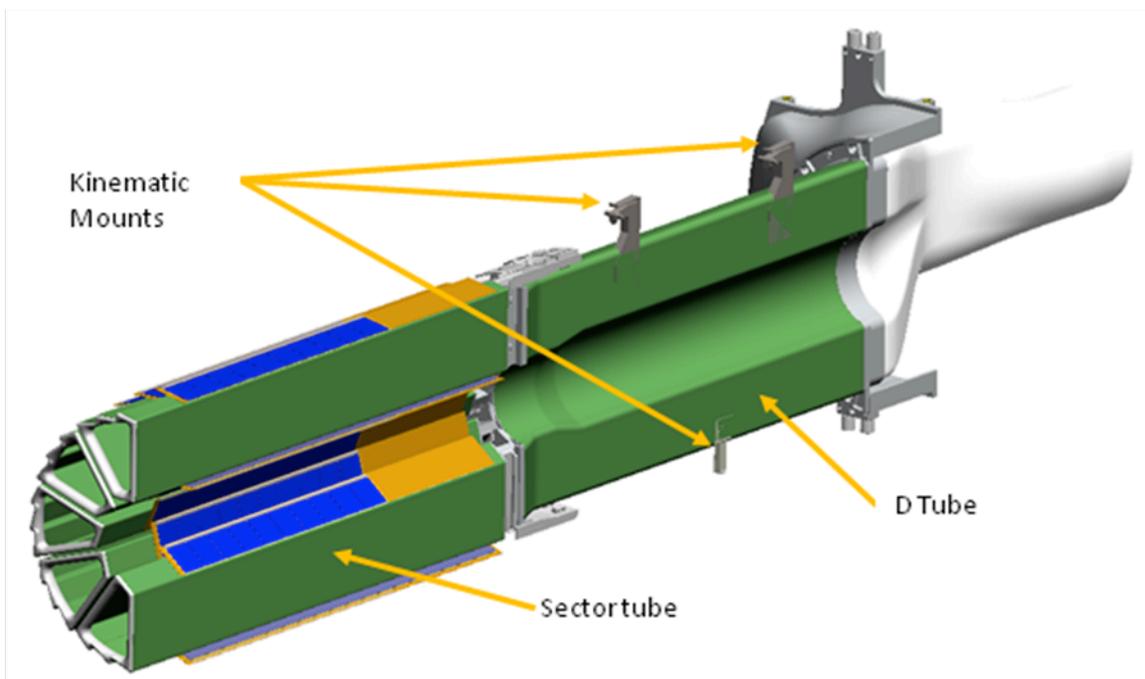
Half module consisting of 5 sector beam modules. The sector beam modules are secured to a carbon composite D tube using a dovetail structure, which permits easy replacement of sector modules. Carbon composite parts are shown in green for greater visibility.
